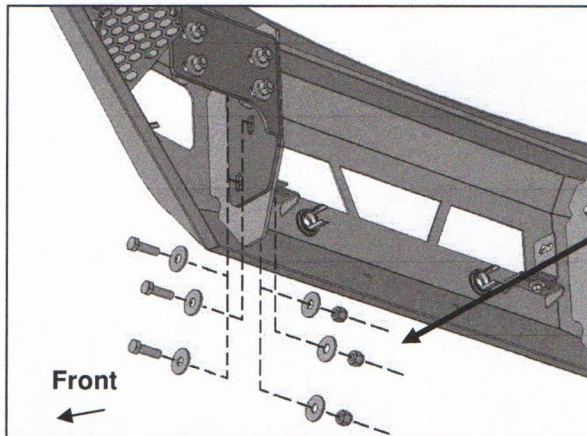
Remove screens if necessary for clearance/access to outer light mounts
